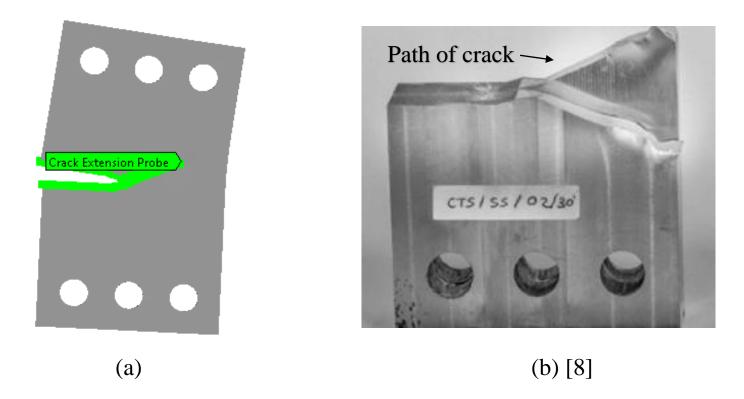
(a) Numerical crack extension and (b) Experimental fracture
